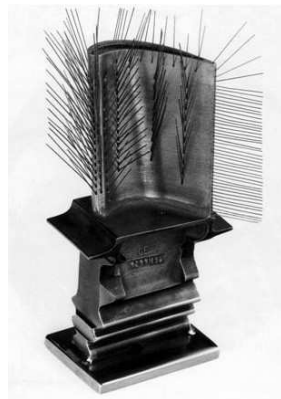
Laser drilled turbine blade (the pins show the various hole directions)
